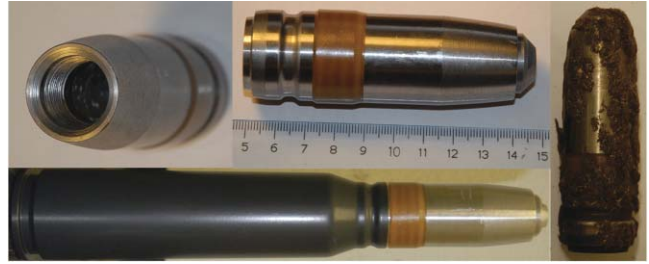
30-mm projectile used for test firing. Bottom picture shows the projectile ready to be fired. To the right, a recovered projectile is shown.
